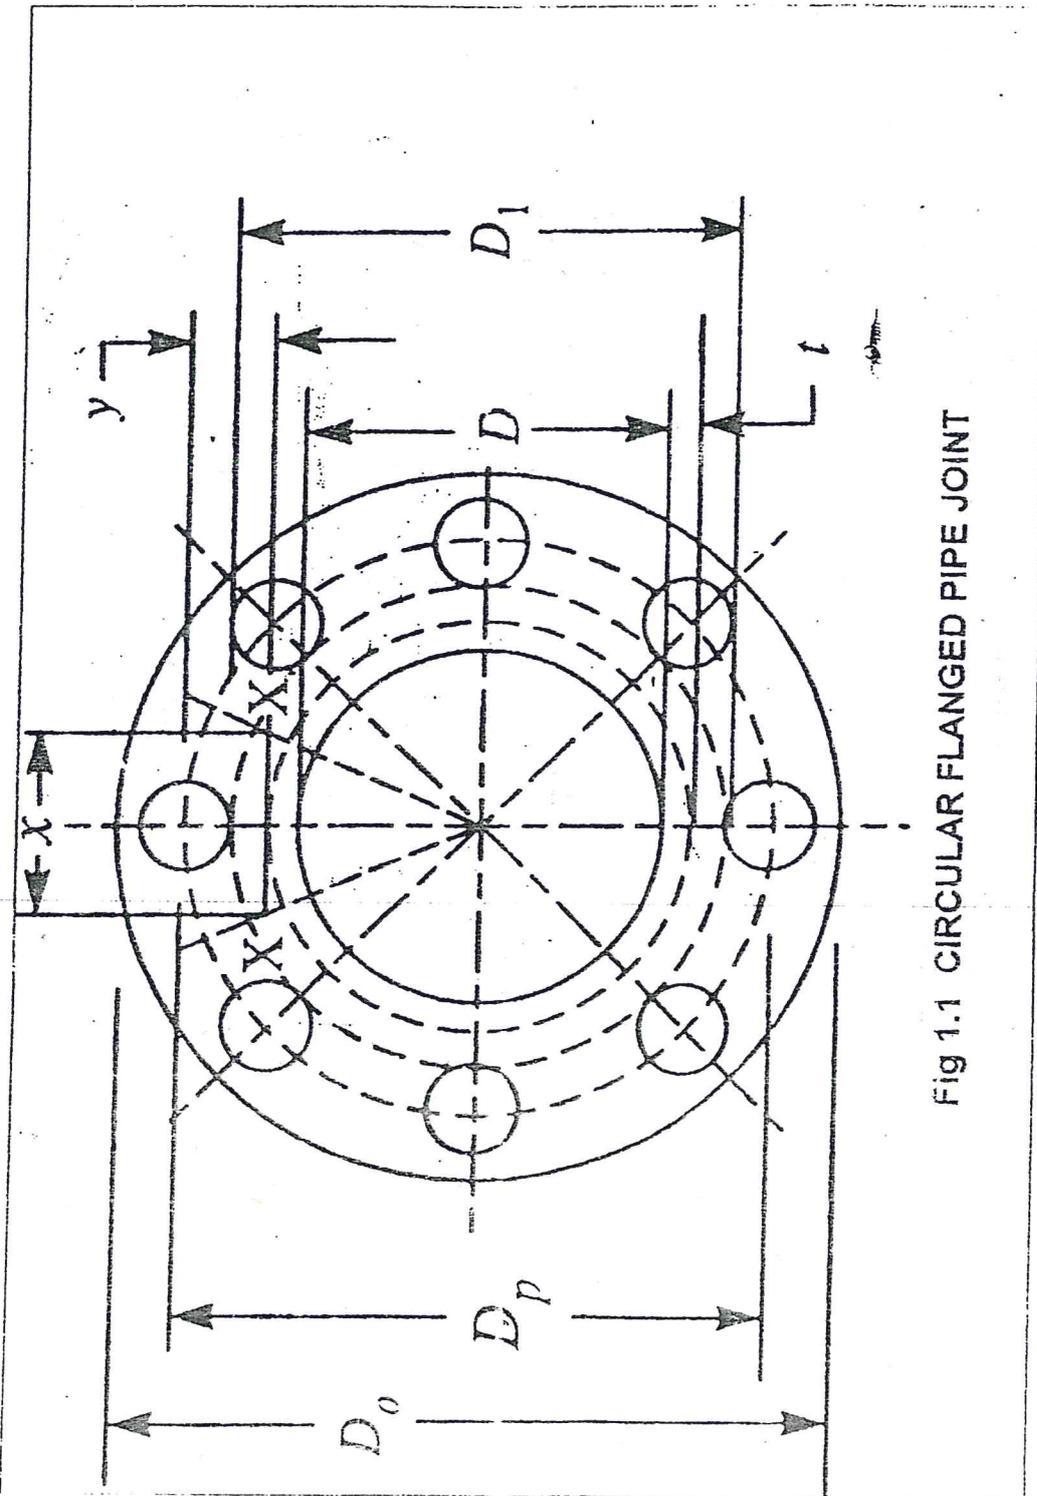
CIRCULAR FLANGED PIPE JOINT
